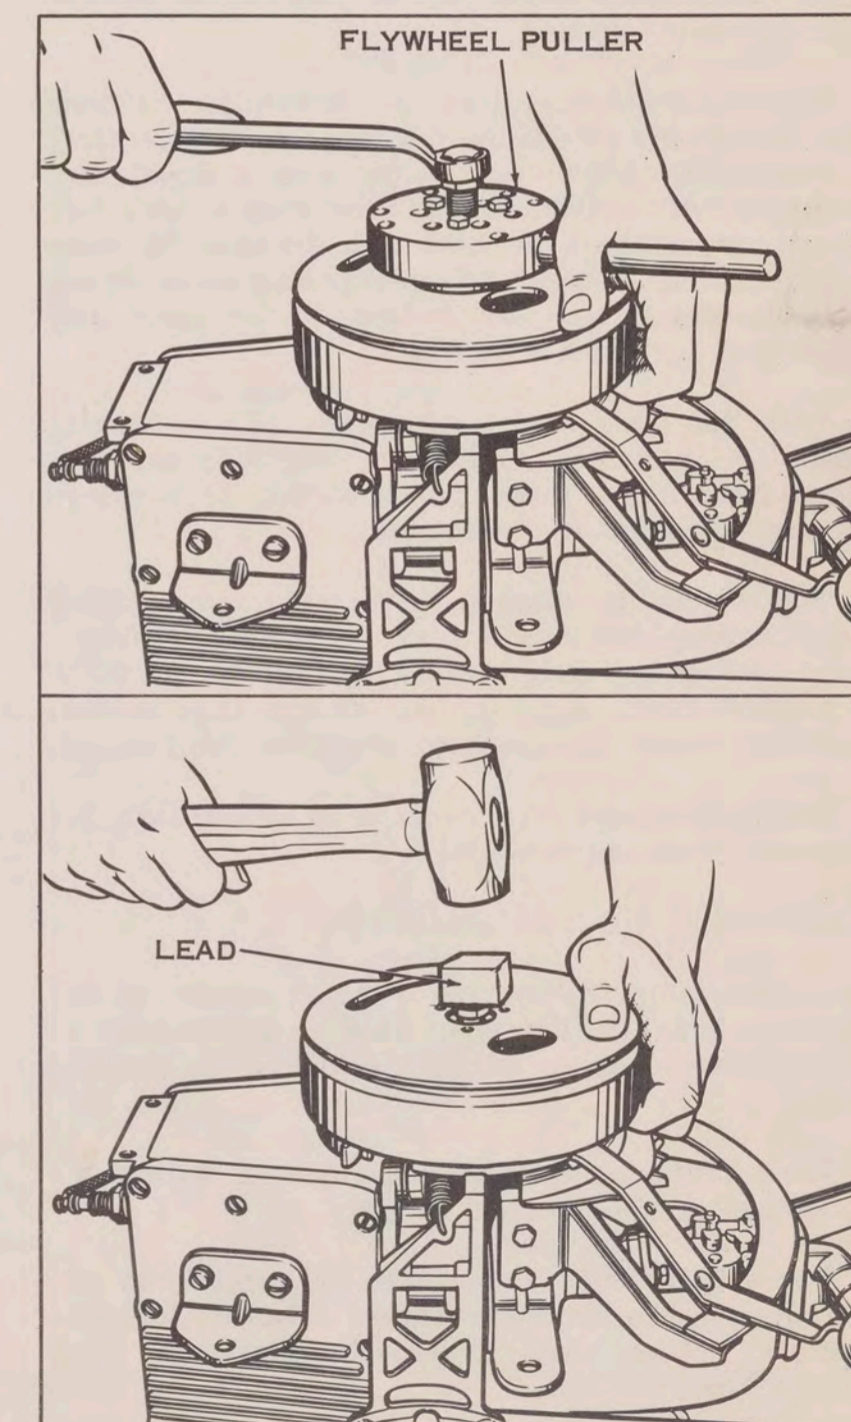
Removing Flywheel With and Without Flywheel Puller
